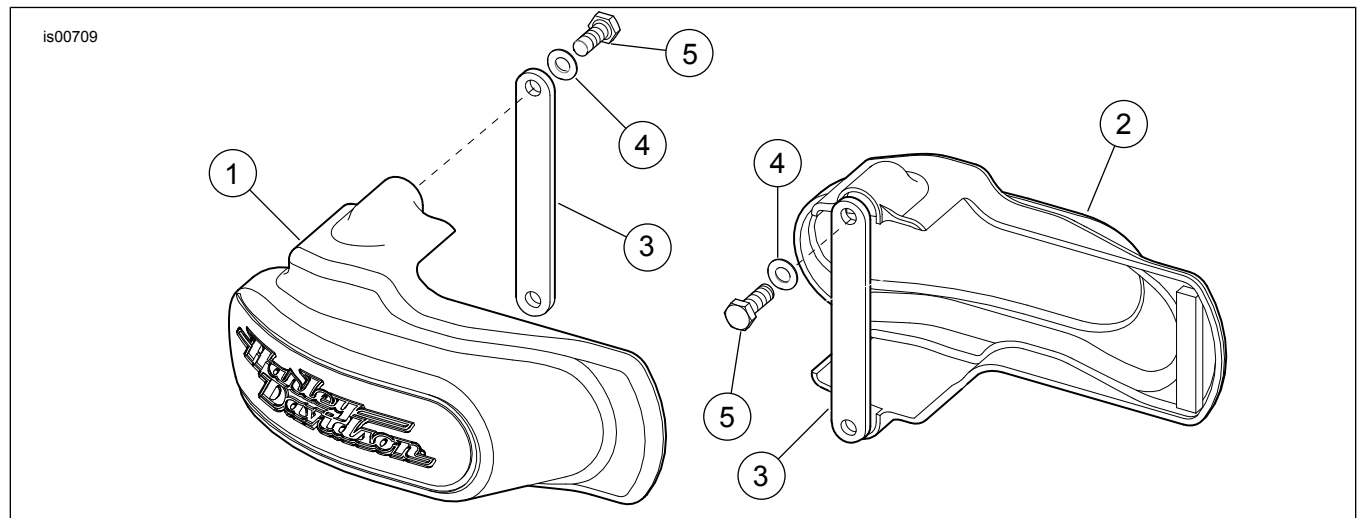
Service Parts: Dyna Swingarm Axle Cover
